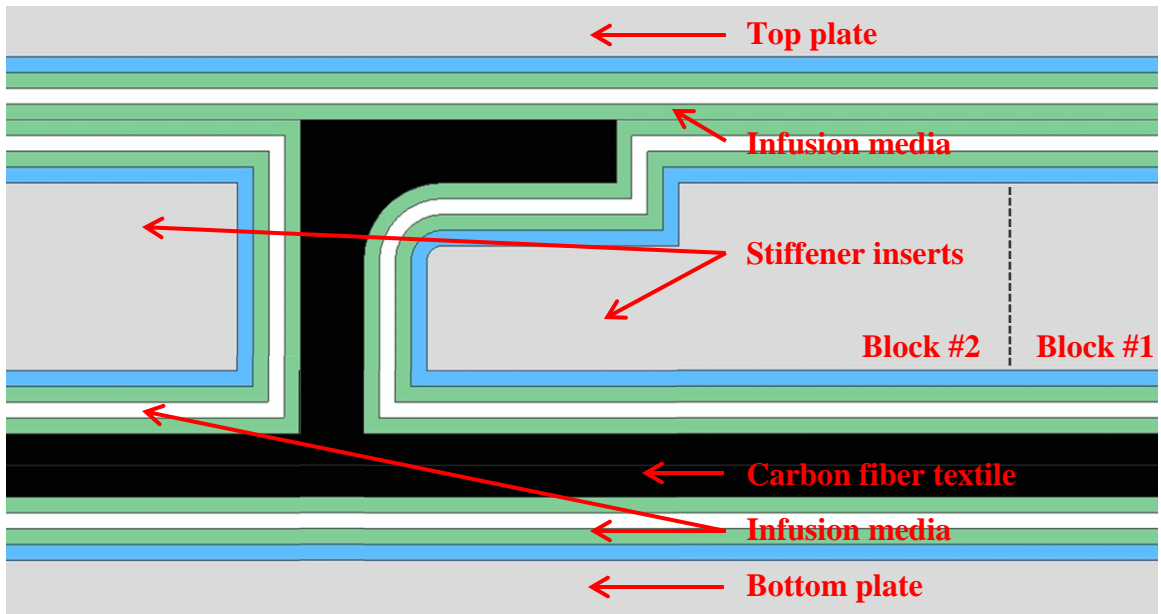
Sectional view of stiffened panel mold for J-shaped stiffeners
